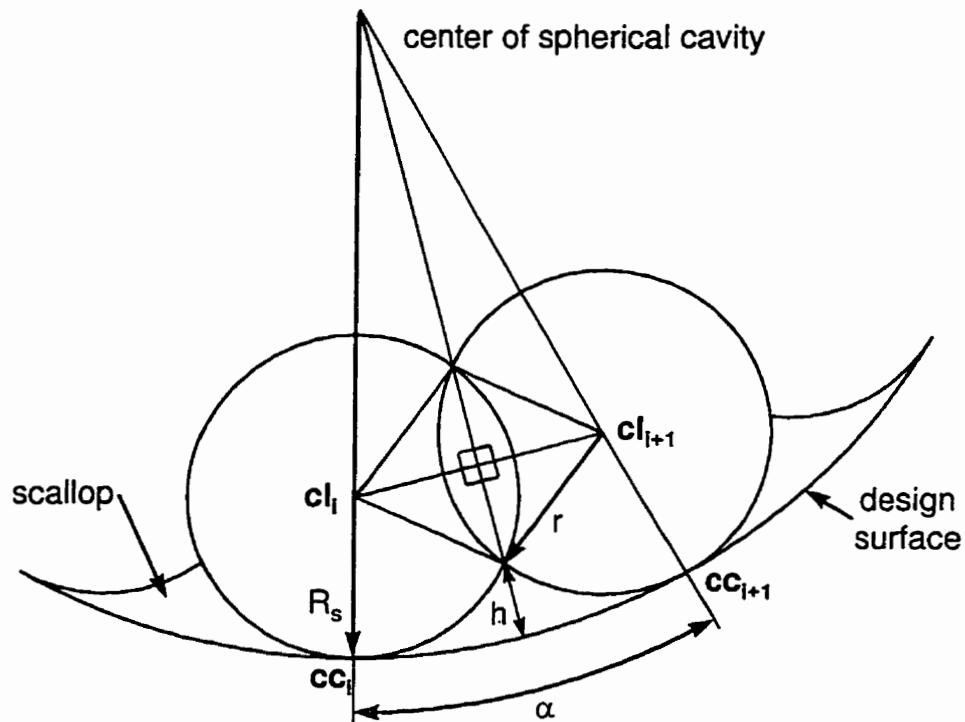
Tool pass interval calculation for ball nosed end mill machining a spherical cavity.
